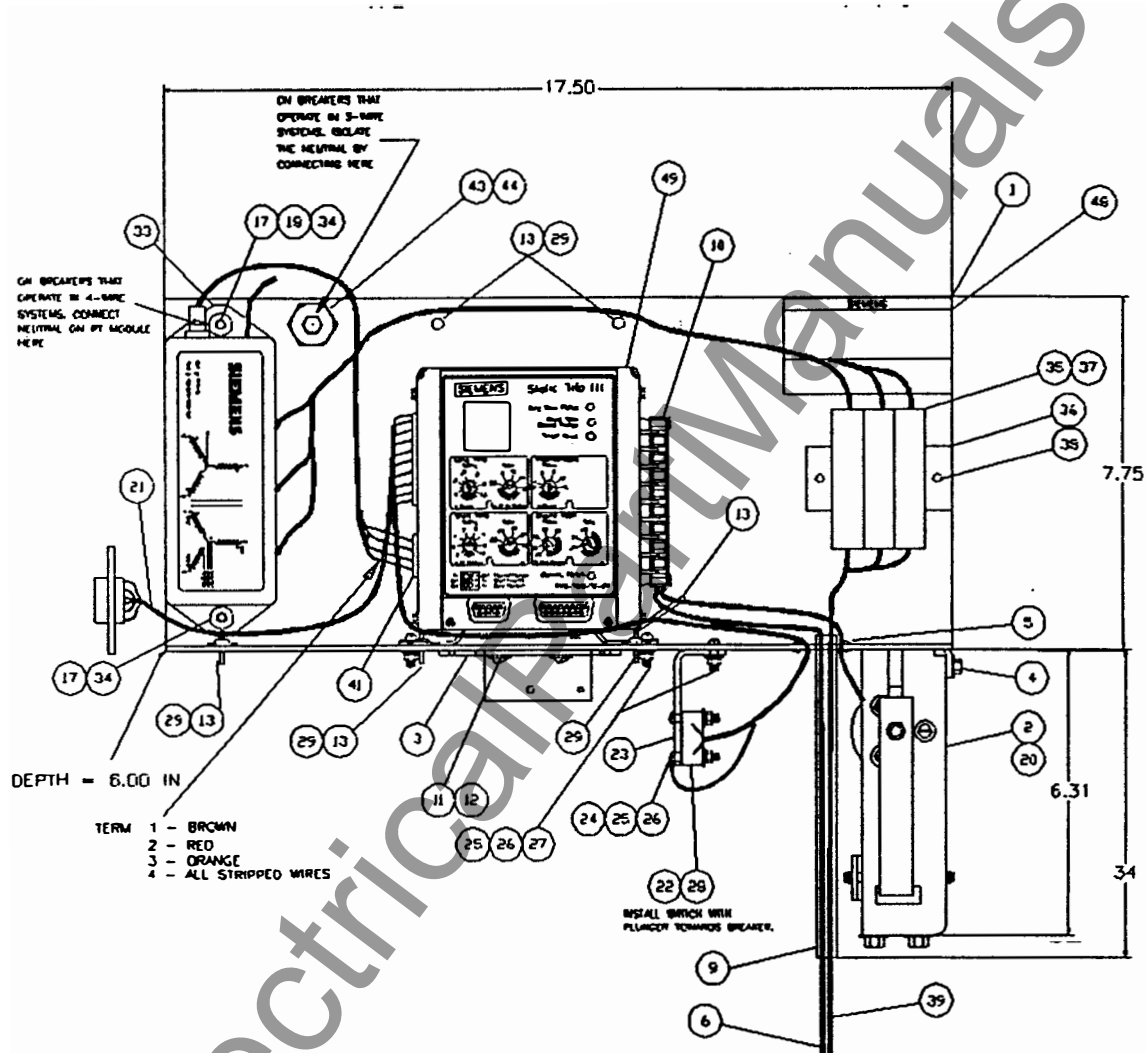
DB-50 Kit Bill-of-Material - p/n 18-824-922-5xx
